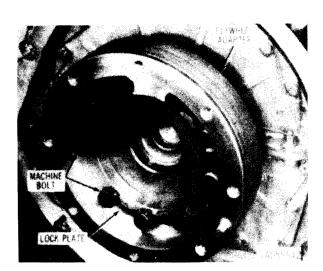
Removing flywheel adapter lock plates and machine bolts, model AVDS-1790-2DR engine.
